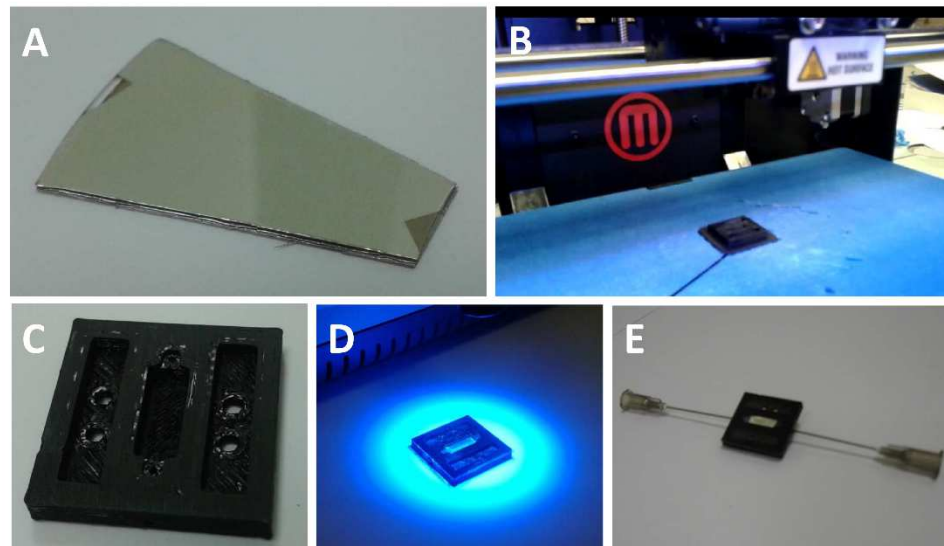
3D printing based fabrication of a flow cell and integration with a BD sensor chip. (a) Flow cell body is designed by a CAD tool and fabricated using a commercial 3D printer out of a PLA filament. (b) Top surface of the flow cell is rubbed with a sandpaper. (c) BD sensor chip is attached with glue inside the channel. A coverglass is bond using UV curable epoxy under UV exposure. (d) Injector needles as inlet and outlet ports are attached to the channel in the same manner with coverglass bonding.
